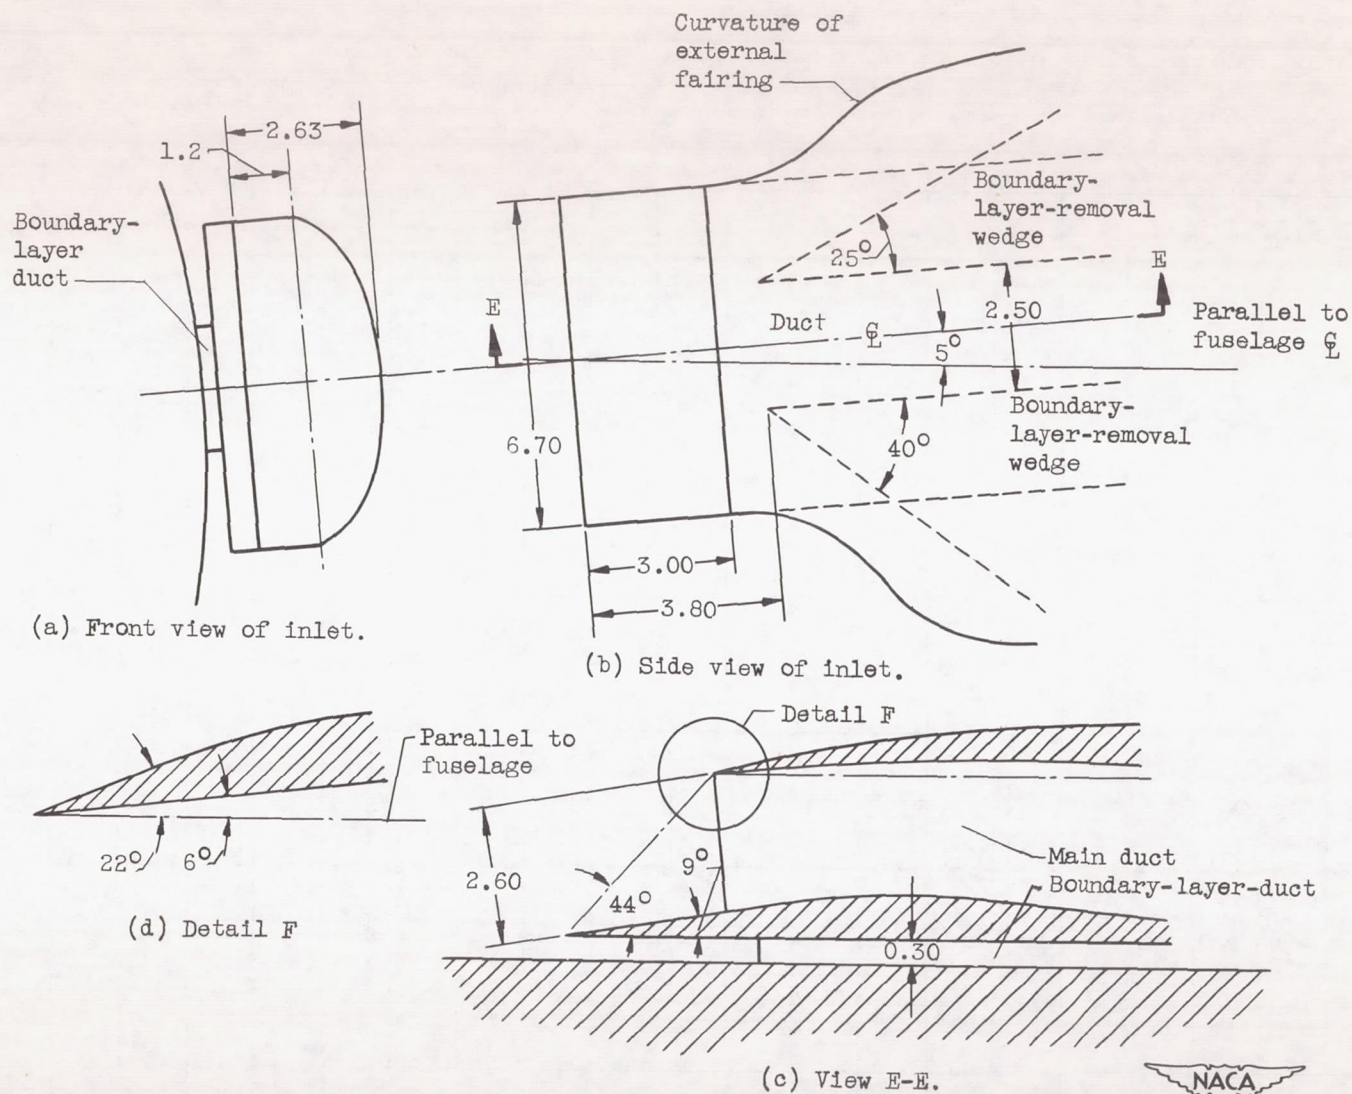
Detailed views of inlet configuration (all dimensions in inches).
